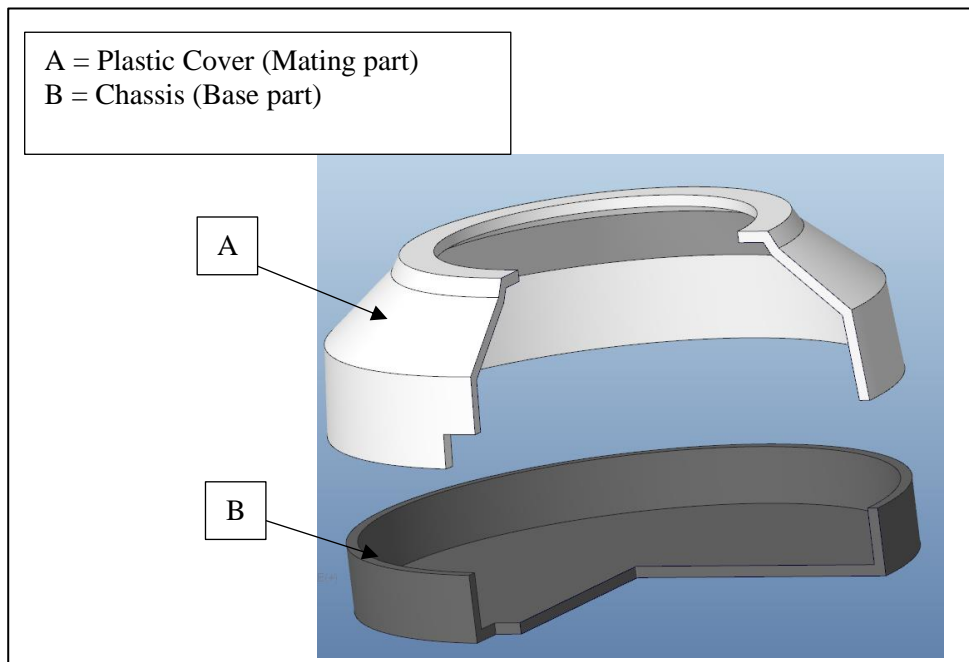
The basic shape of the mating part is an enclosure that has a slight conical form. The basic form of the base part is also an enclosure, as the electronics and sensors will cover the inside.
